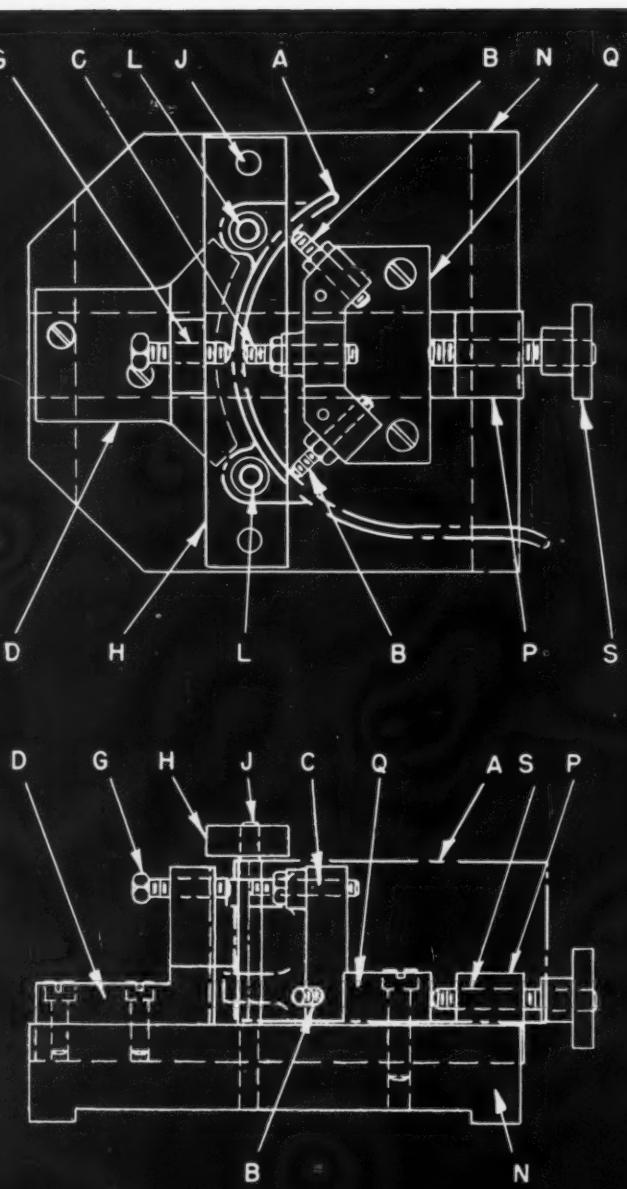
(Top) By eliminating segment (C) from one edge of a cast guard (A), two of the guards can be placed together for grinding surfaces (B)
